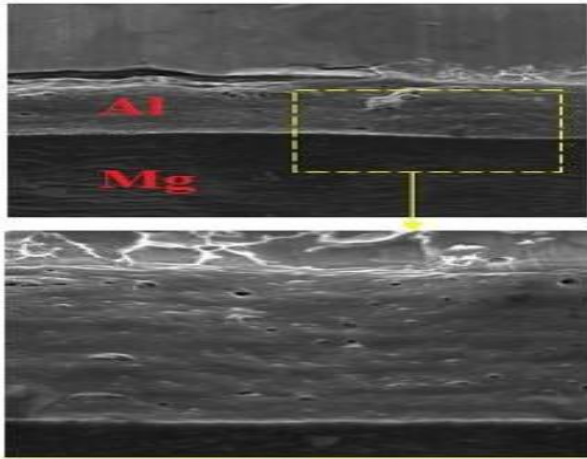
Tensile fracture surfaces of three-layer Al / Mg / Al composite produced by CRB
